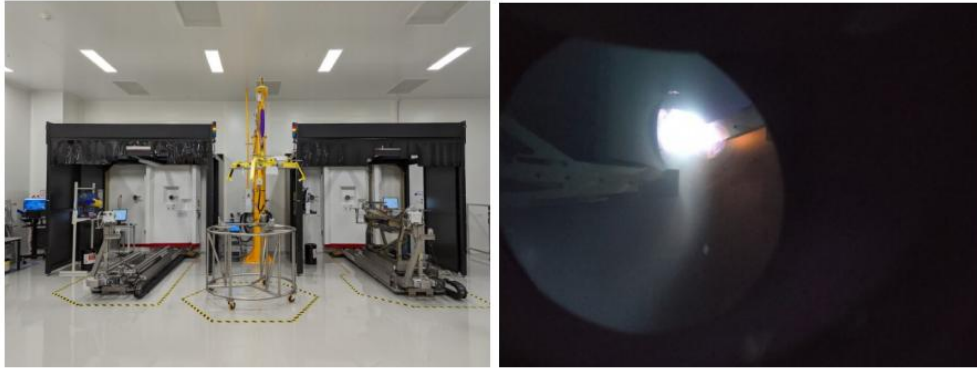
(a) Two IBF machines. (b) Ion beam on the segment surface inside the vacuum chamber.⁸⁶
